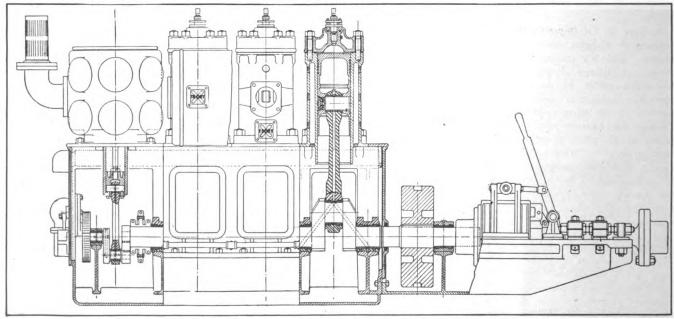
NEW MARINE DIESEL ENGINE, BUILT BY TROUT CO. IN SIZES RANGING FROM 75 BRAKE HORSEPOWER 3-CYLIN-DERS TO 480 BRAKE HORSEPOWER 6-CYLINDERS
